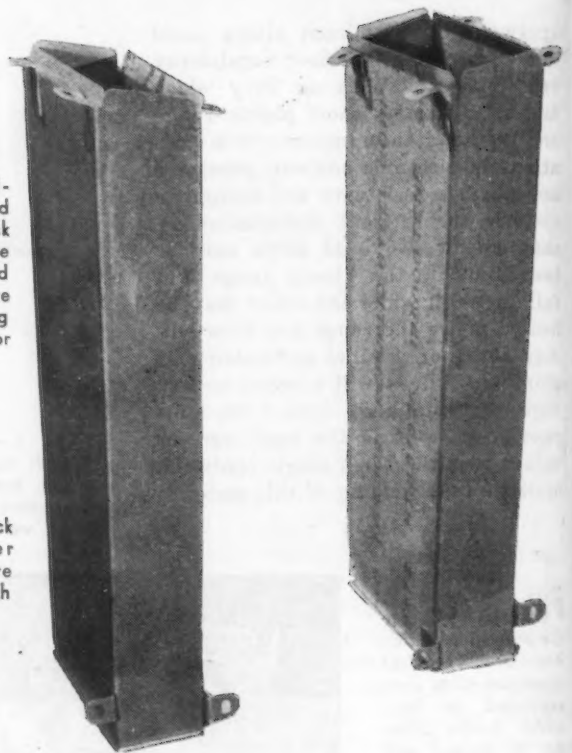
Nose ammunition feed chute after welding. Only 18 spots are required for tack assembly.
